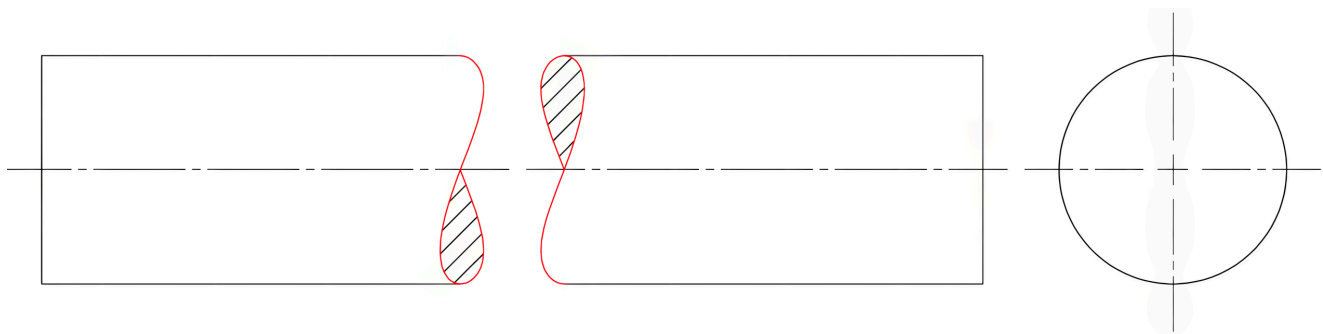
Cylindrical part using an “S”-shaped long break line.
